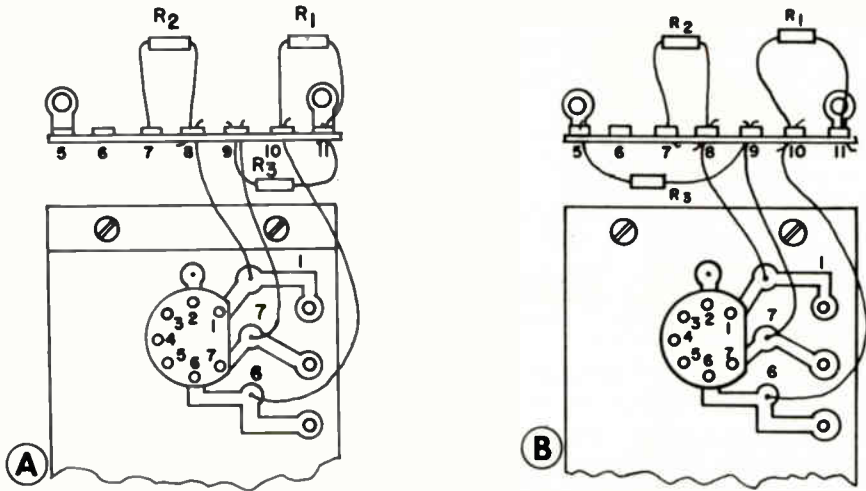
Examples of how you could have wired the circuit used in Experiment 4.
